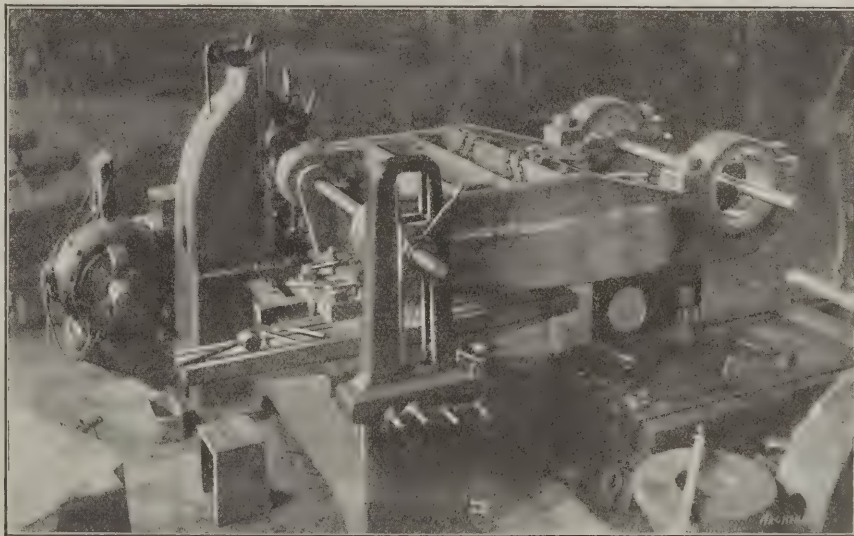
Boring a Disappearing Mortar Carriage Casting on a Universal Boring Machine
